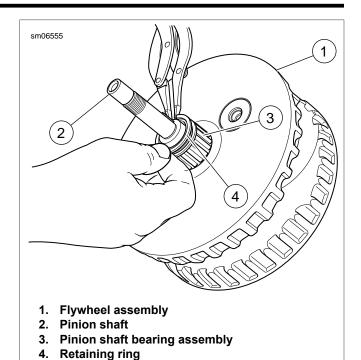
Removing Pinion Shaft Bearing Retaining Ring
